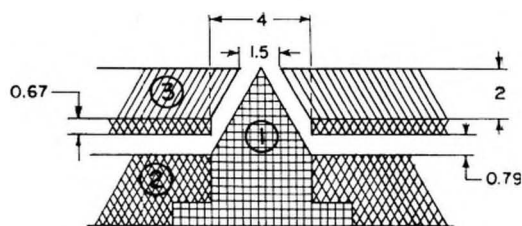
Mixing cell (side view) dimensions are given in mm. Cell has been drawn 5× actual size.
